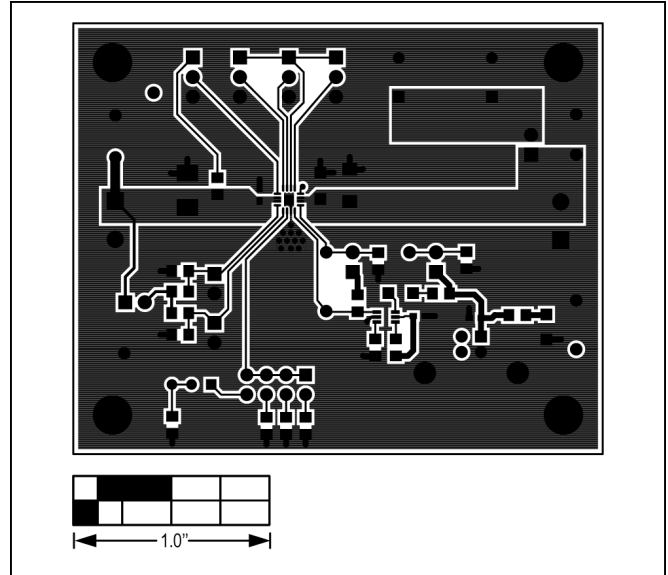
MAX14588 EV Kit PCB Layout—Component Side
